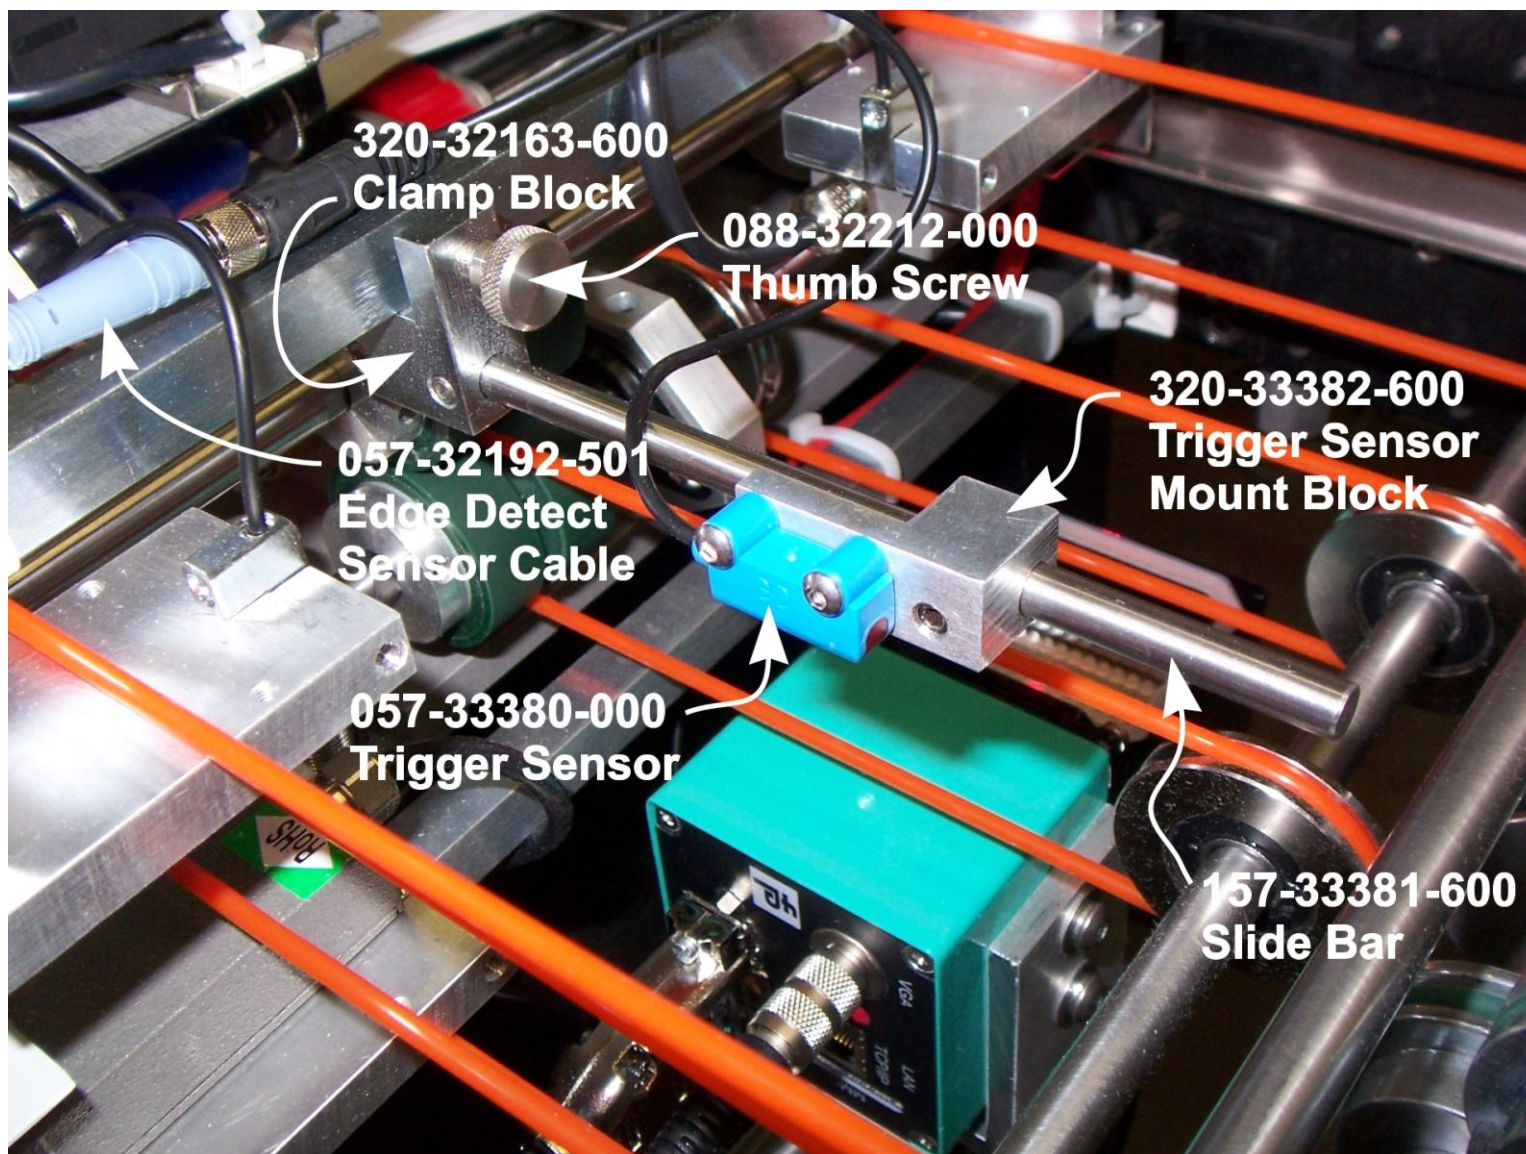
View of Trigger (Lead Edge Detect) Sensor Mounting Parts
